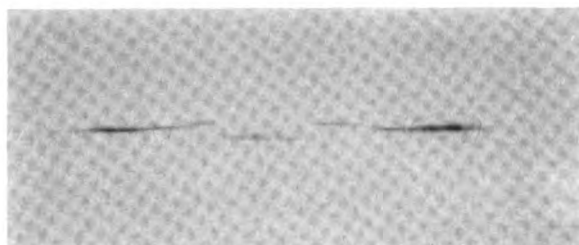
Radiograph Showing Pipes and Ruptures in a Steel Casting.
